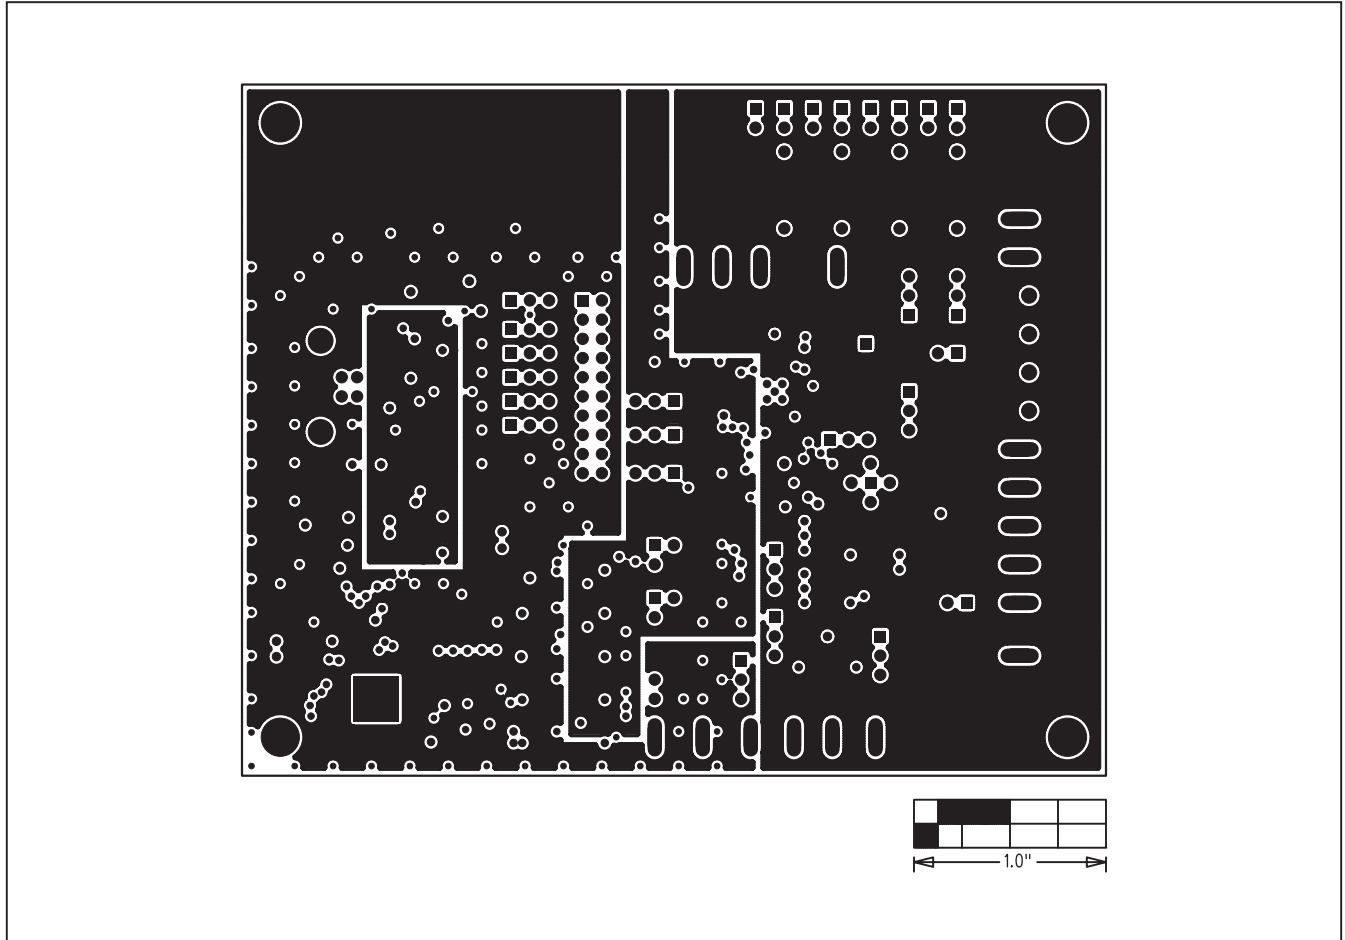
MAX15501 EV Kit PCB Layout—Layer 3
